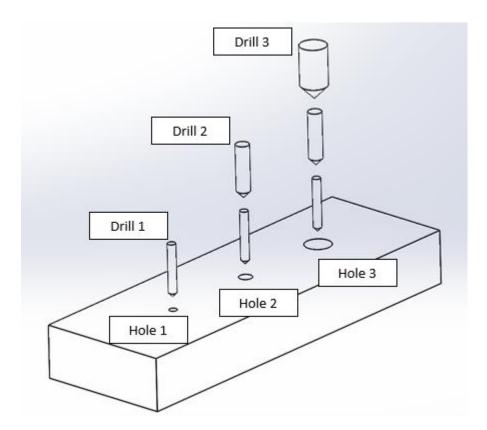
Multiple stages to drill a hole on workpiece (Sketch using SolidWorks)
